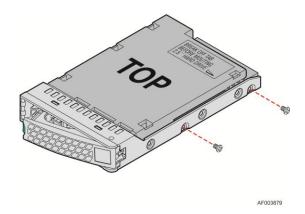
3.5" hot-swap hard drive carrier with 2.5" HDD Interface Bracket
